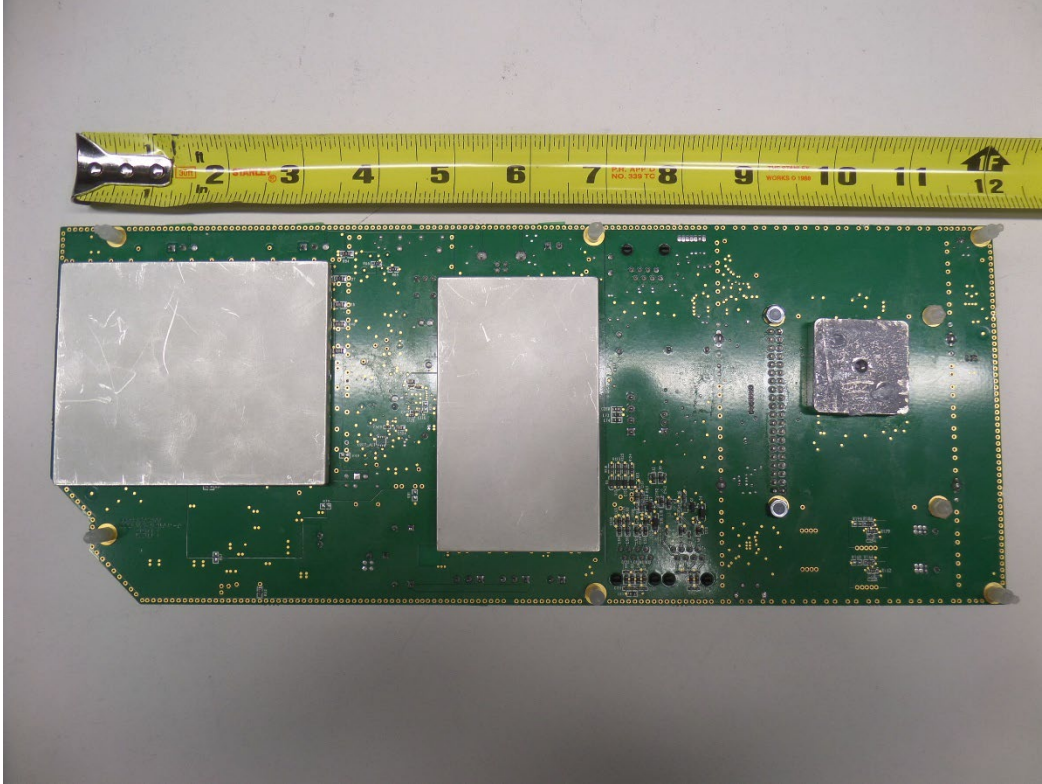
NP22 PRI/PAB LOWER BASE EAS RF BOARD BOTTOM SIDE
